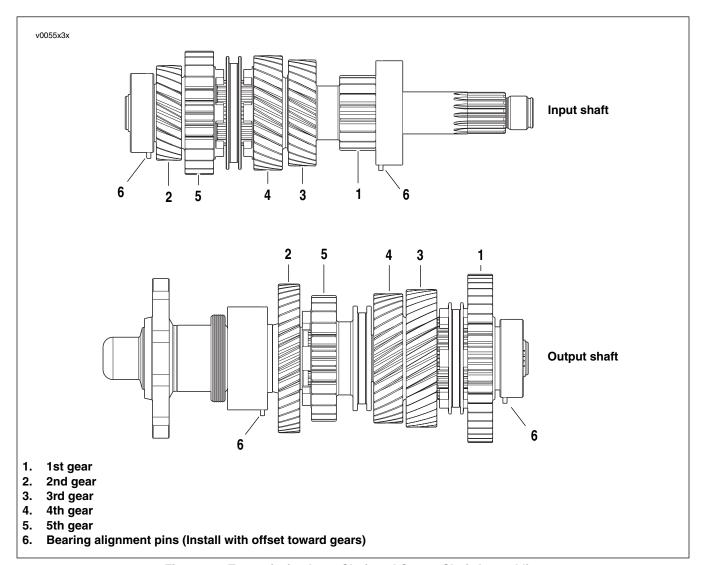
Transmission Input Shaft and Output Shaft Assemblies
